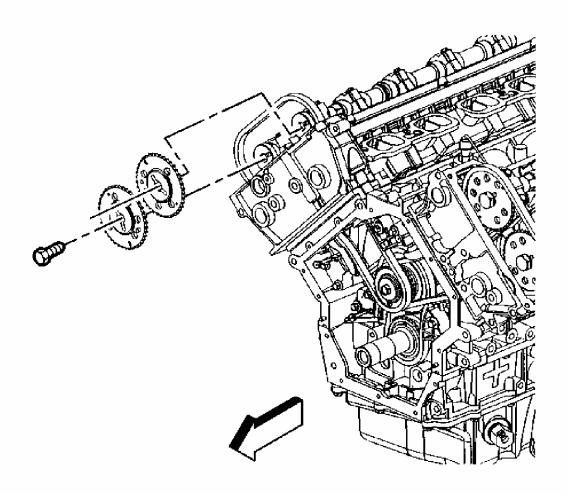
Identifying Right Intake Camshaft Sprocket Bolt Courtesy of GENERAL MOTORS CORP.
